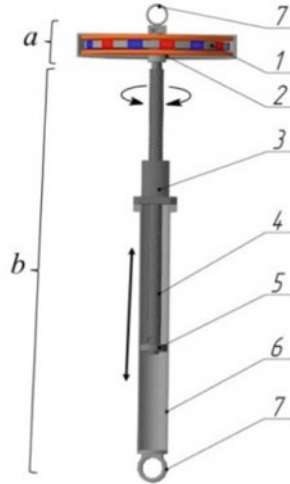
Physical model of electromechanical shock absorber with a ball-screw drive. a Generator; b Ball-screw drive; (1) rotor; (2) stator; (3) drive nut; (4) shaft bushing; (5) movable support; (6) case; (7) eyelet
